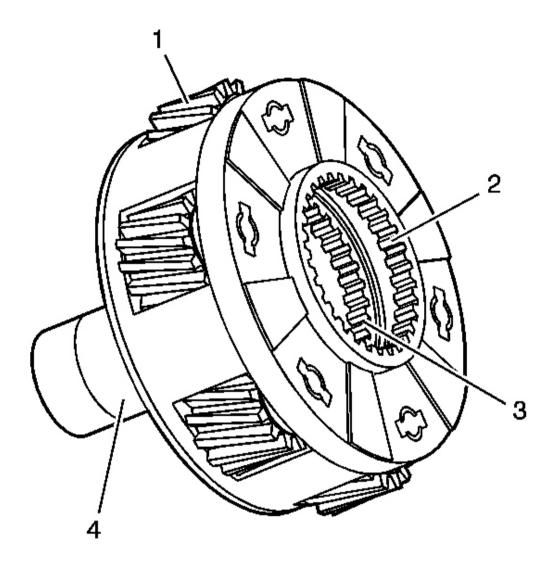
Inspecting High/Low Planetary Carrier Courtesy of GENERAL MOTORS CORP.
